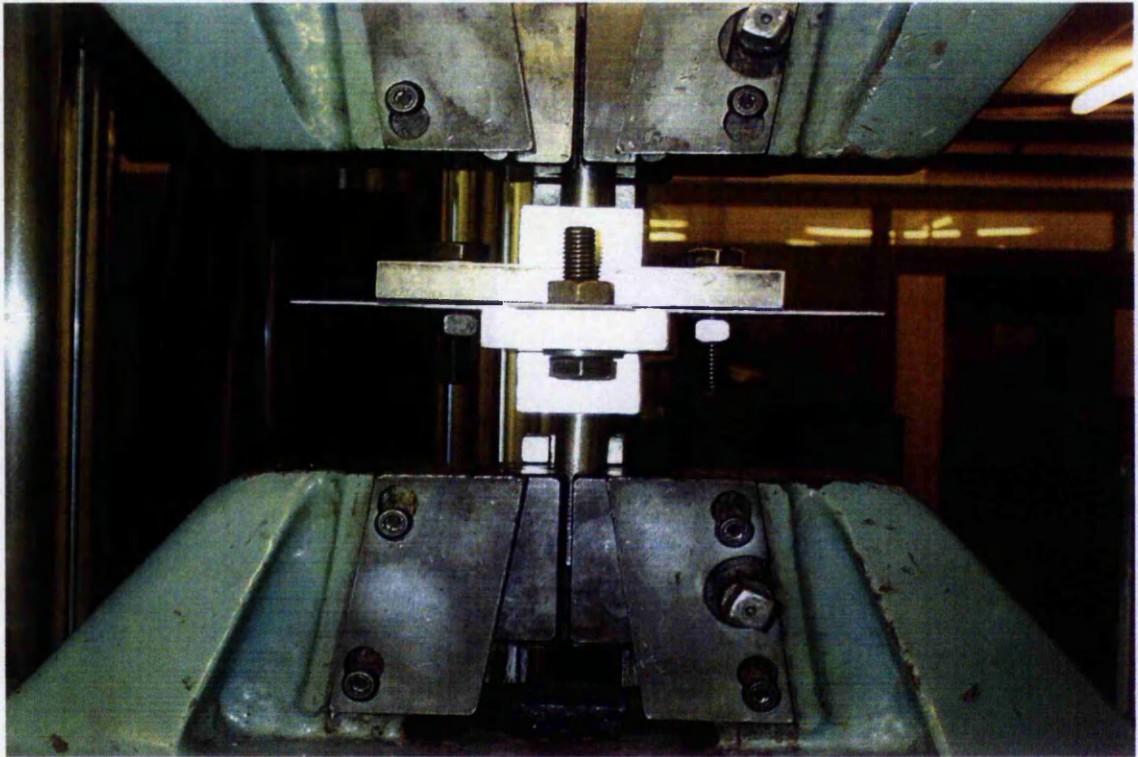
Cross tension testing jig fitted to testing machine (without washers)
